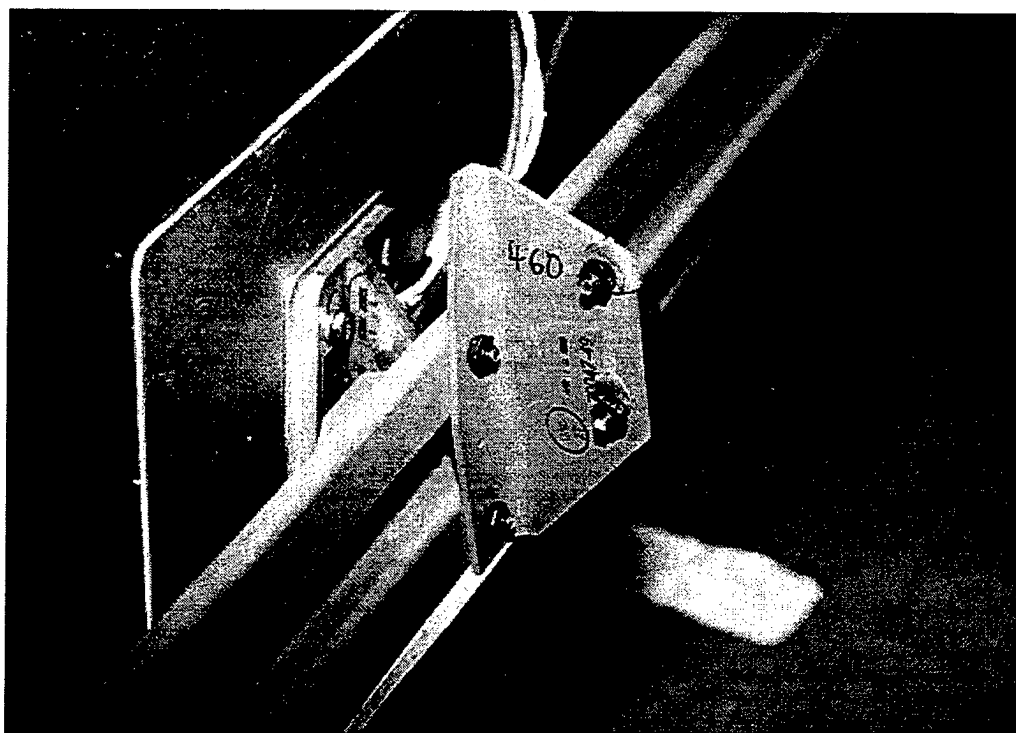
POSTTEST BIN A UPPER RAIL (FS460) DETACHMENT VIEW
